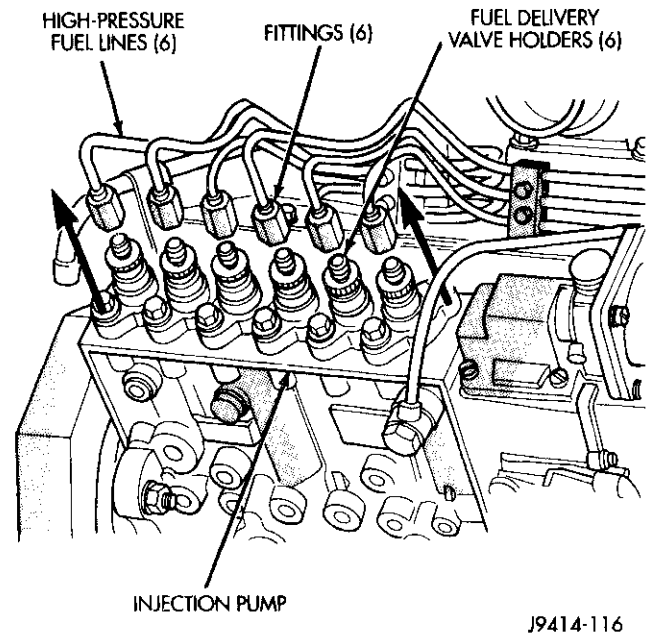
Fuel Delivery Valve Holders and Pressure Lines
